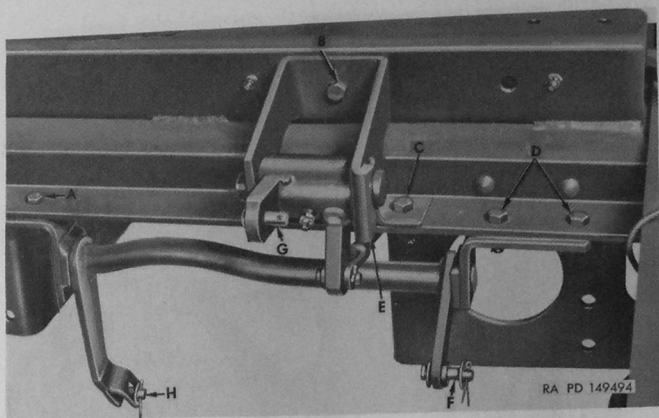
Transfer cross shaft and parking brake relay lever disconnect points.
